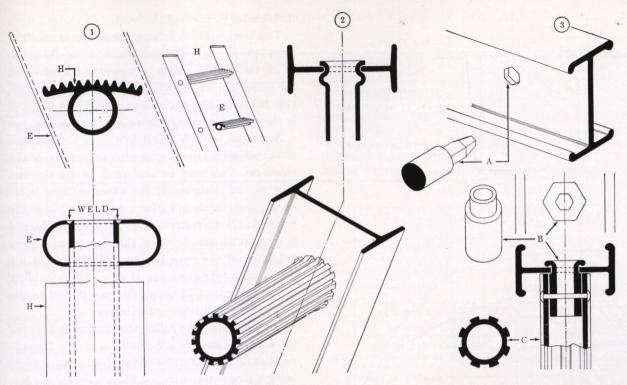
Examples of mechanical interlocking joints in tubular extrusions. Sketch 1; Ends of hollow step, section H, are trimmed to leave only the tubular section, which is then inserted through and welded to vertical hollow section, E. Sketch 2; Tubular ladder rungs are joined to solid upright section by expanding to form beads. Sketch 3; Connection is made by shouldered ring, B, which is riveted to extrusion, C, inserted into hexagonal opening in I-beam section, then expanded and upset with steel tool, A.
